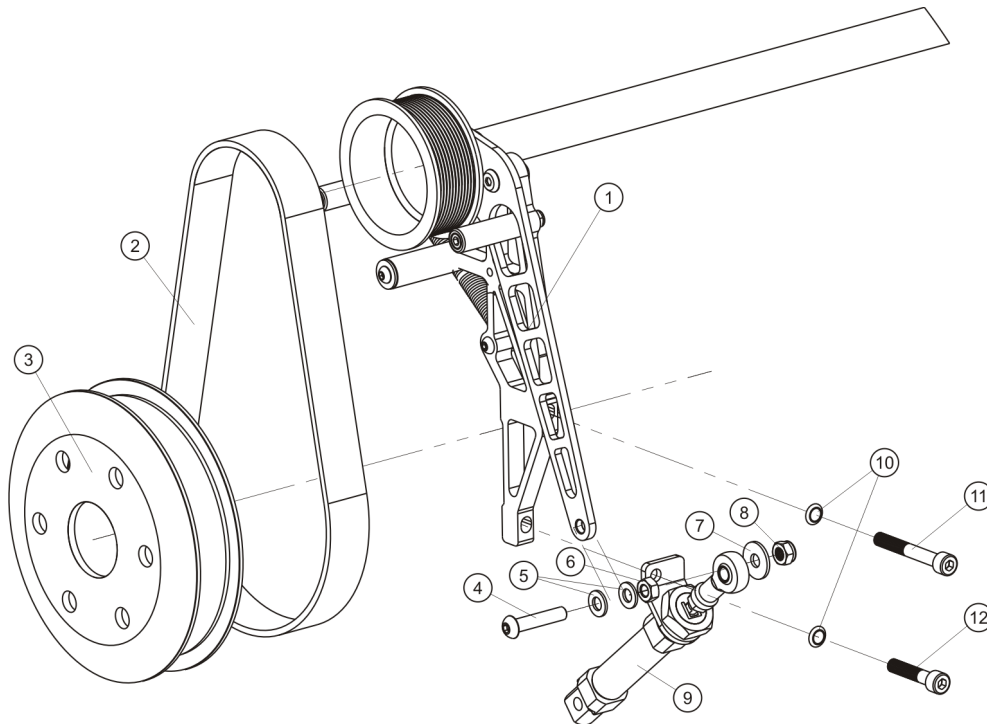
Pre-rotator clutch - belt, pulleys and actuation (lower engagement)
